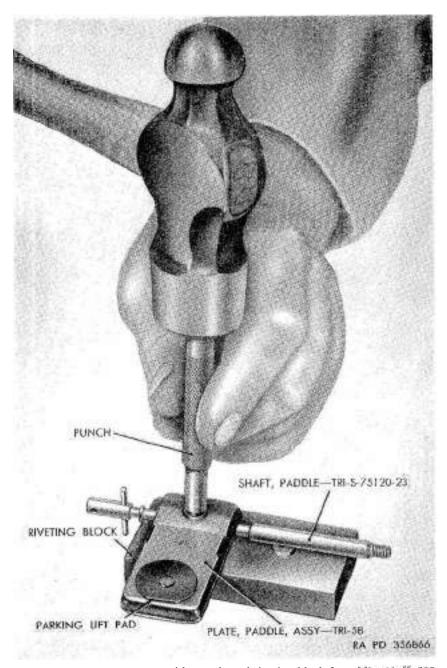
Setting rivet with punch and riveting block from kil—11-K-250.
